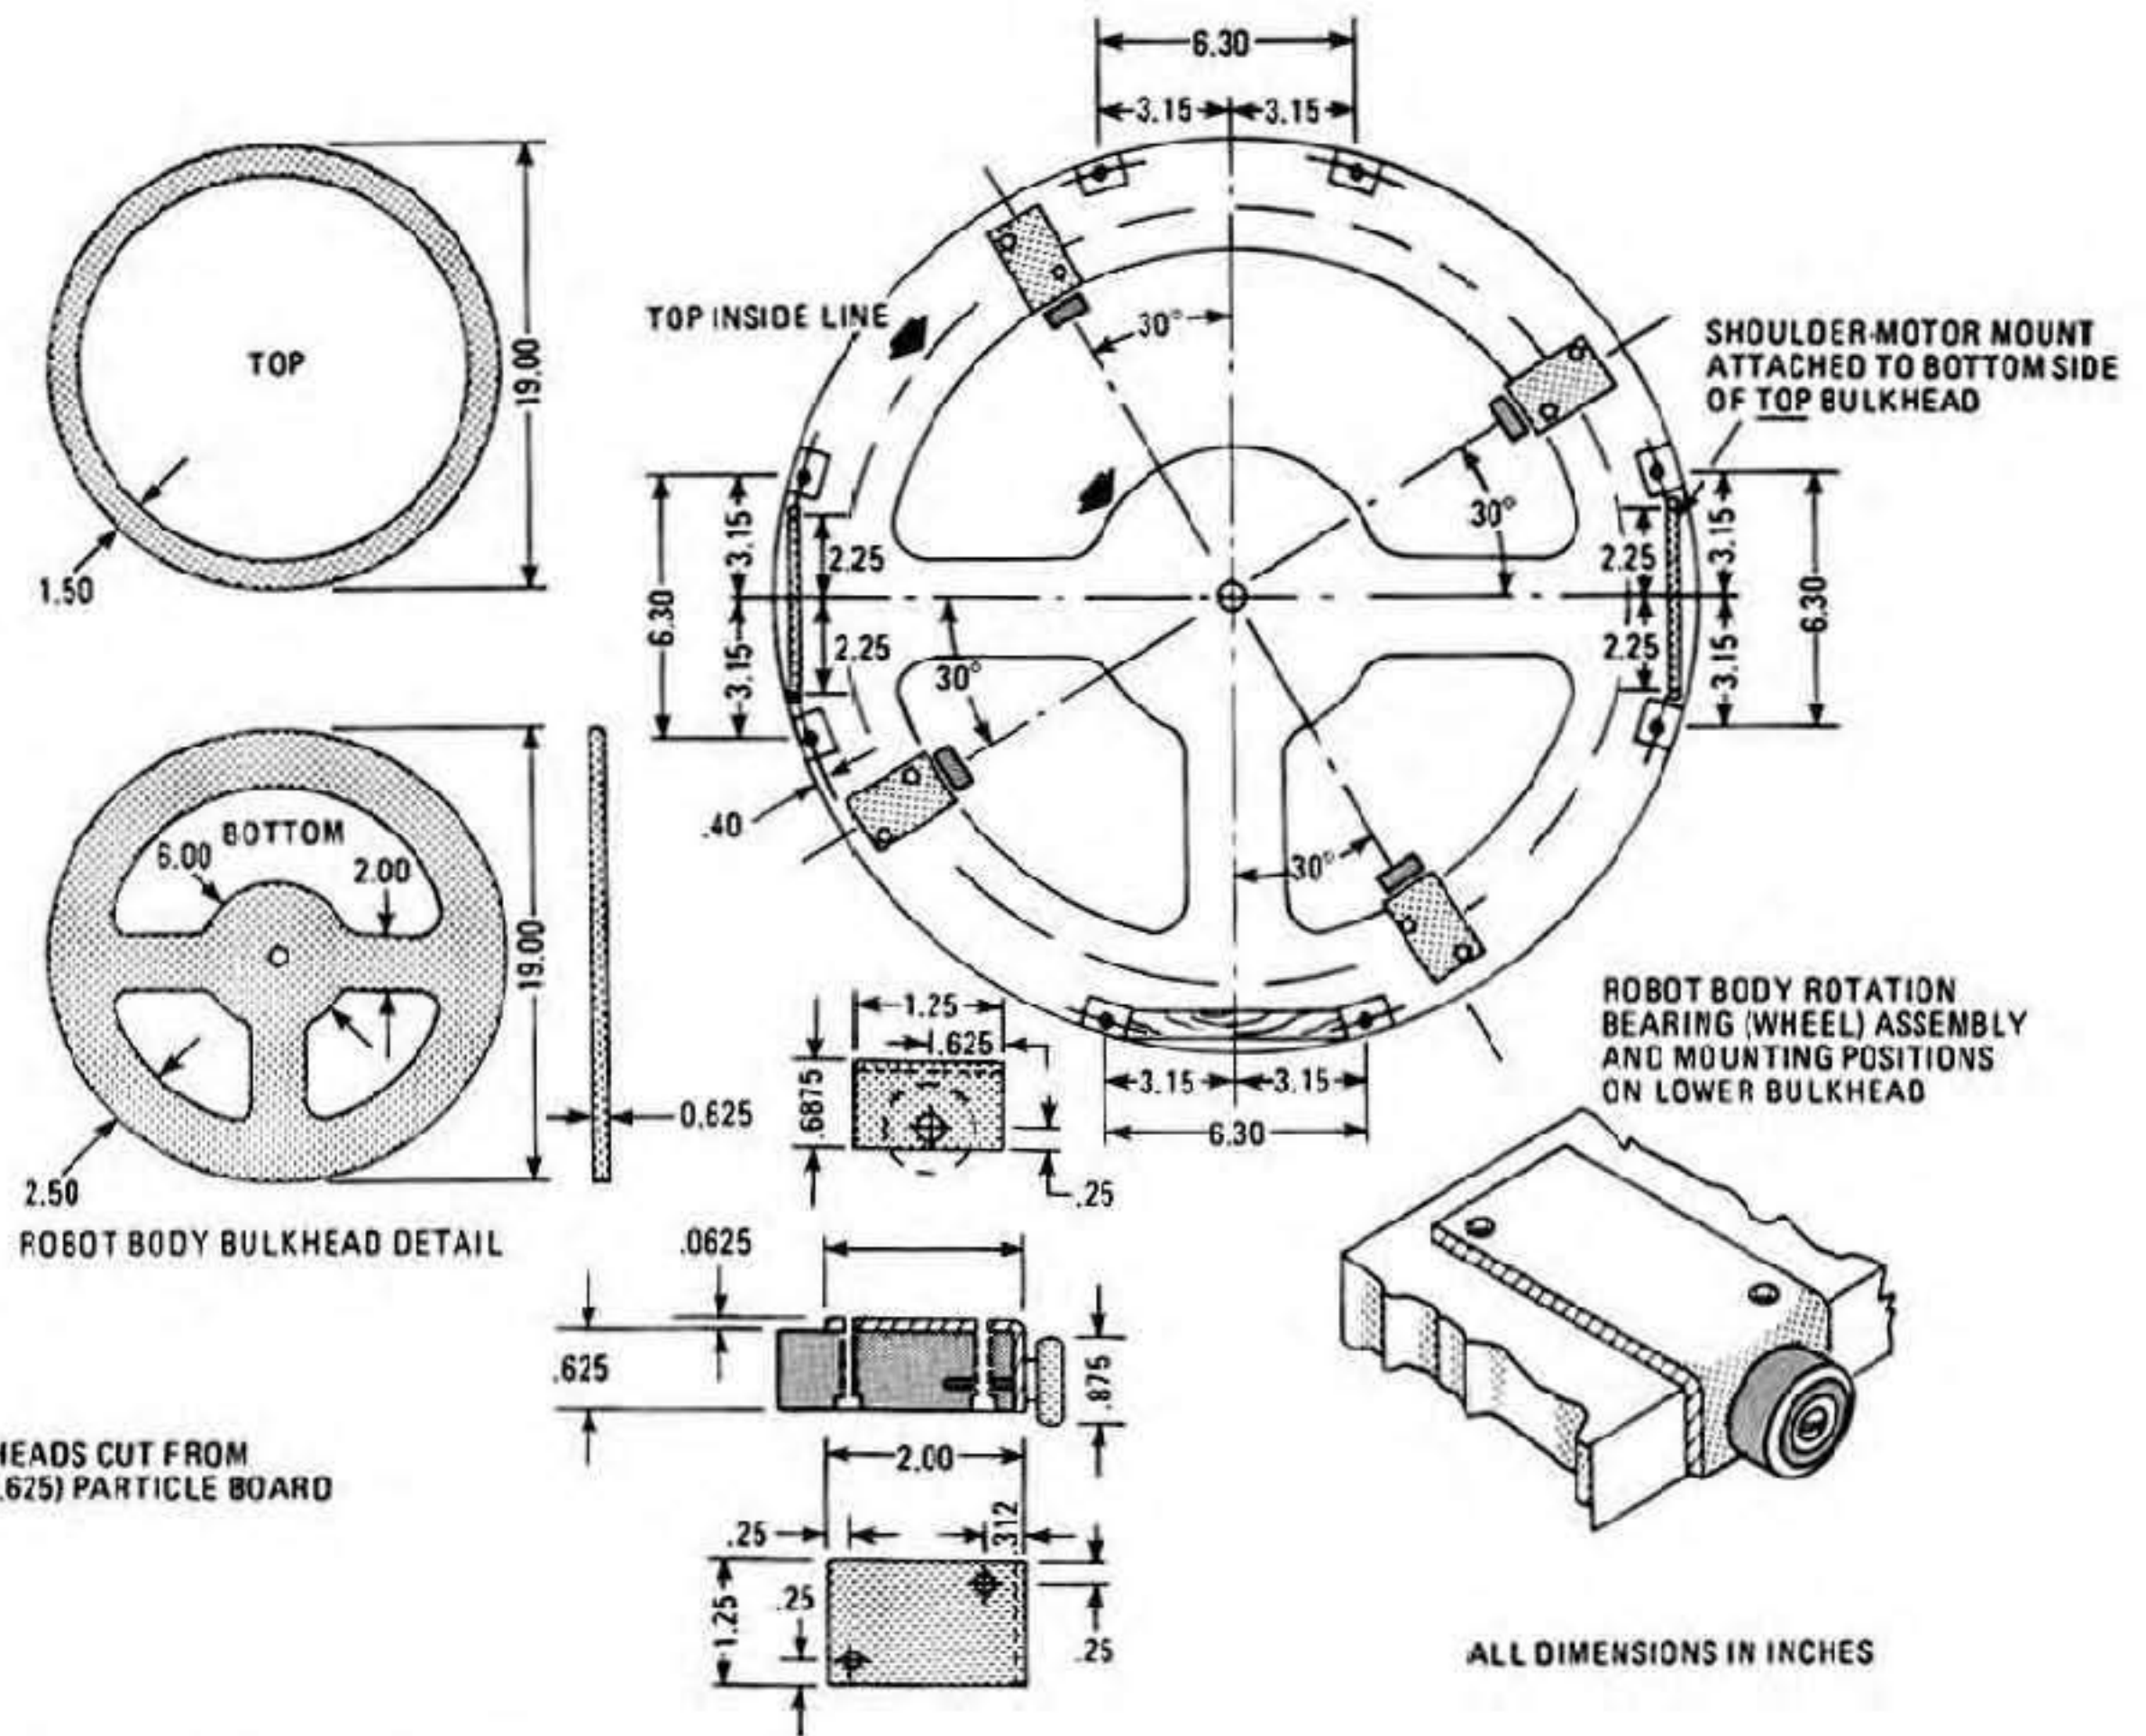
TOP AND BOTTOM BULKHEADS are cut from particle board. Bottom bulkhead is sturdier to bear body weight. Bearing mounting brackets are made from 1/4-inch aluminum.
